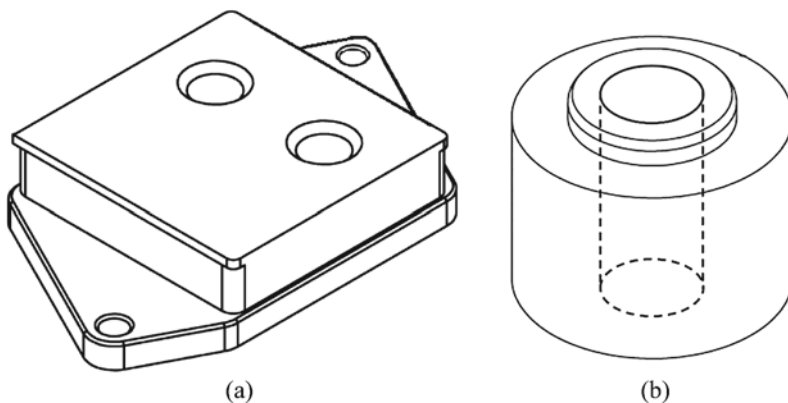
Schematic diagram of a fixture main body and b spacer pin
